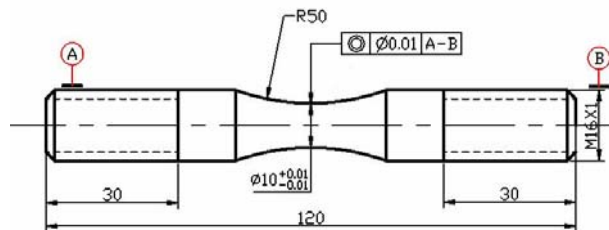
Schematic of shape and dimension of the specimen for fatigue test (Unit: mm)
